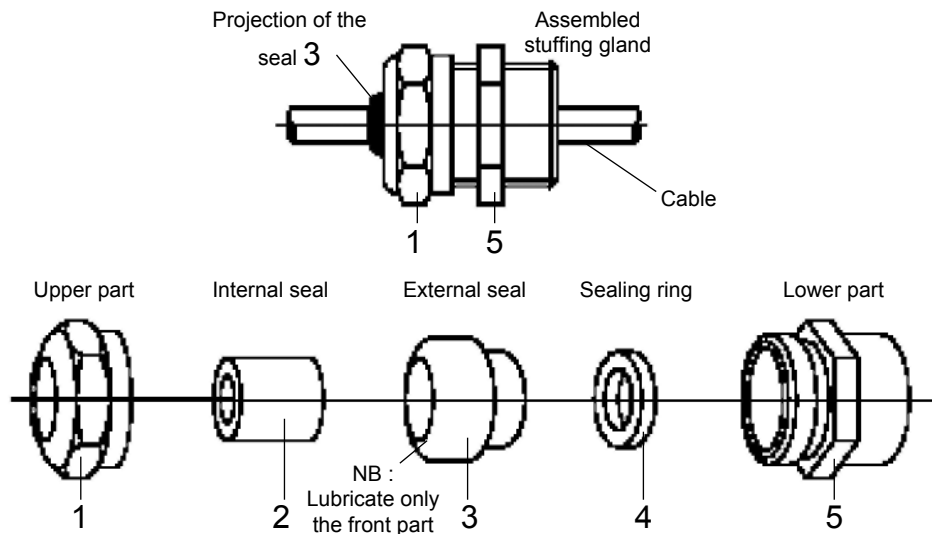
Stuffing gland (view of the assembly and exploded view).
